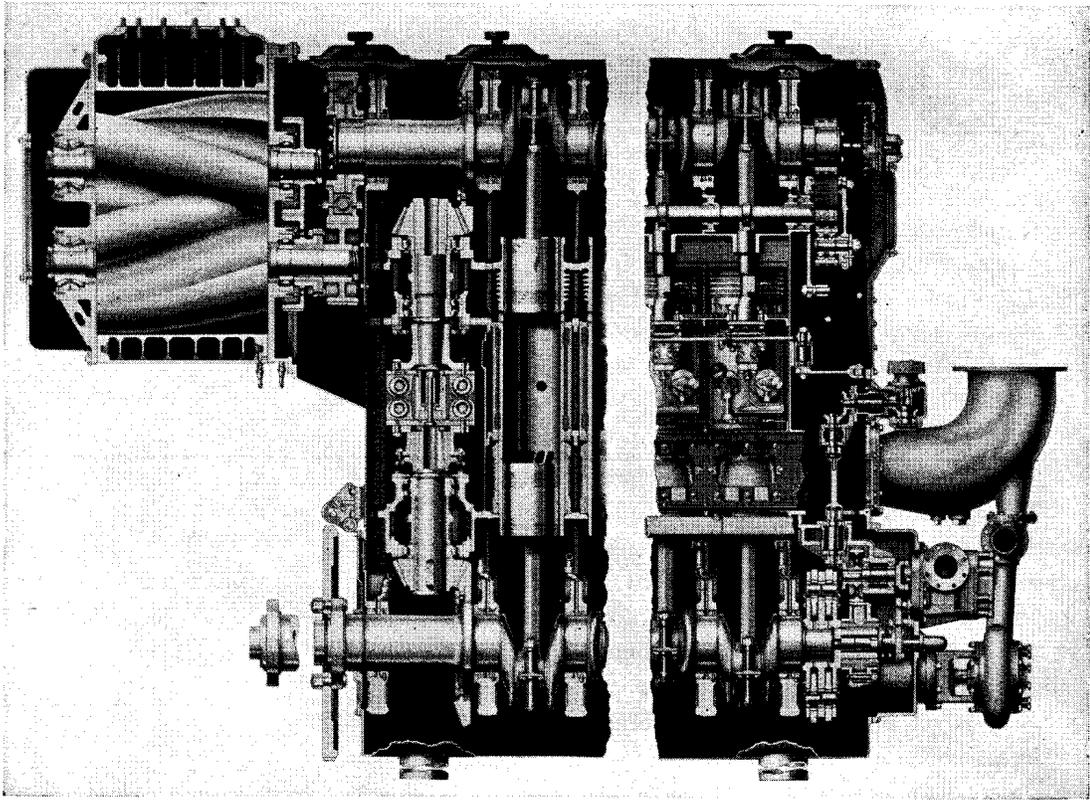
Longitudinal Cross Section. Opposed-Piston Engine.
